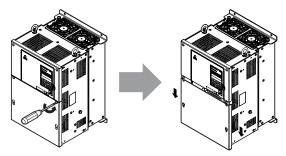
Removing the Terminal Cover on an IP00/Open Type Enclosure Drive
